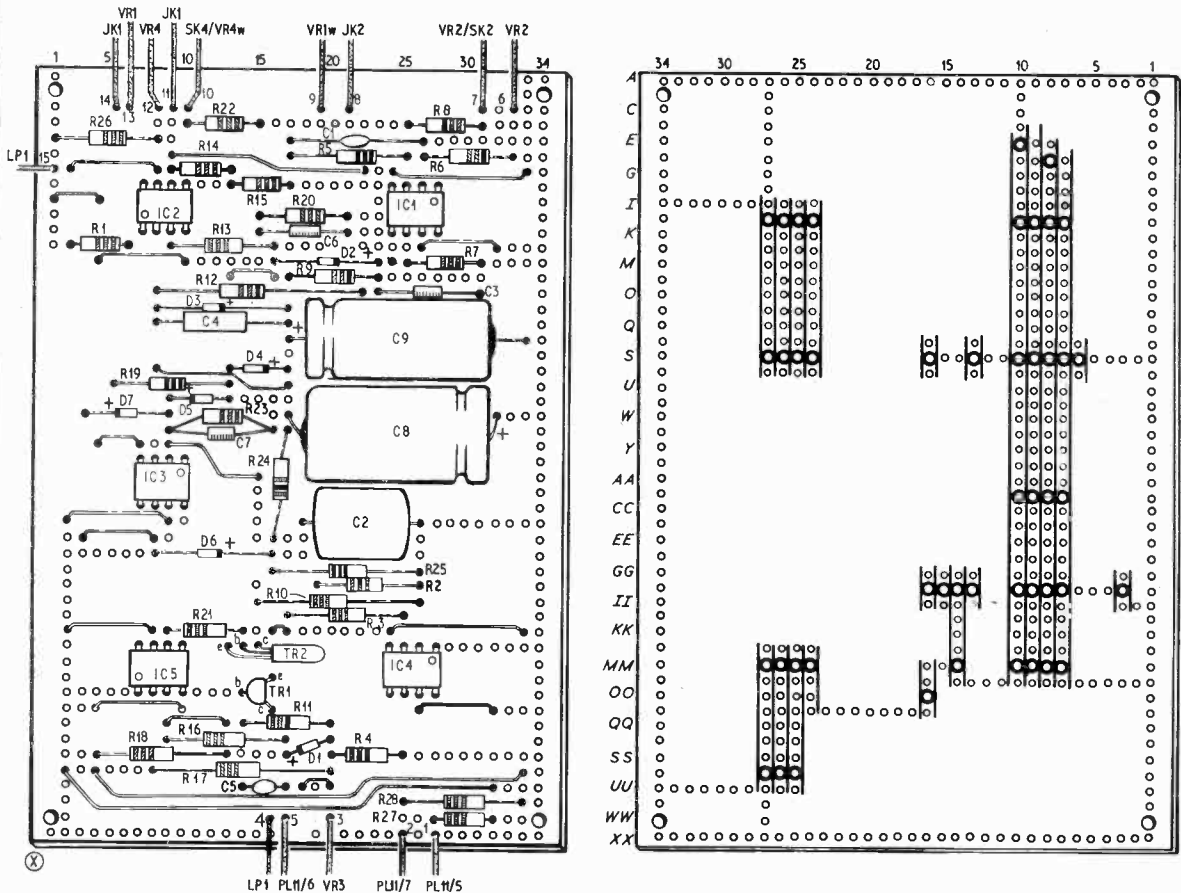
Component layout and wiring of Sample and Hold Board
